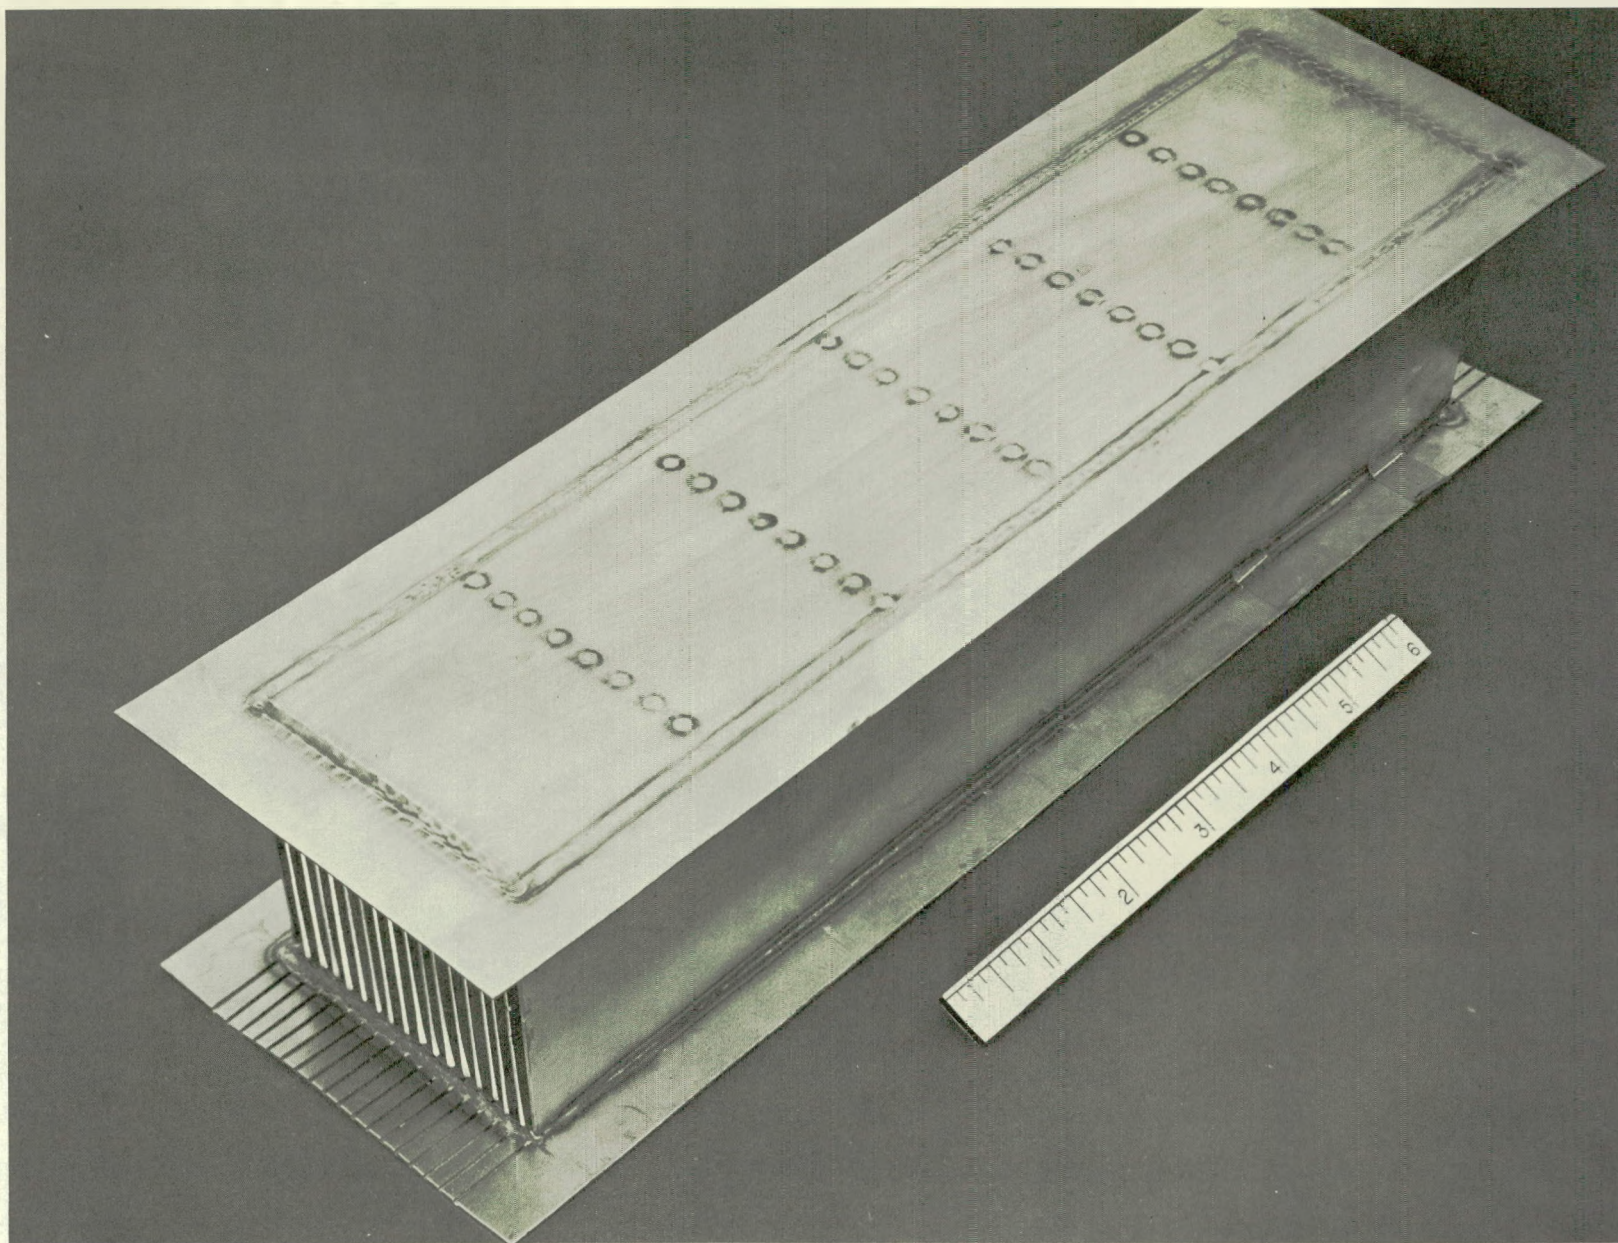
Welded Fuel Box Assembly Mock-Up Using Transverse Spot Welds to Hold Fuel Plates in Place
